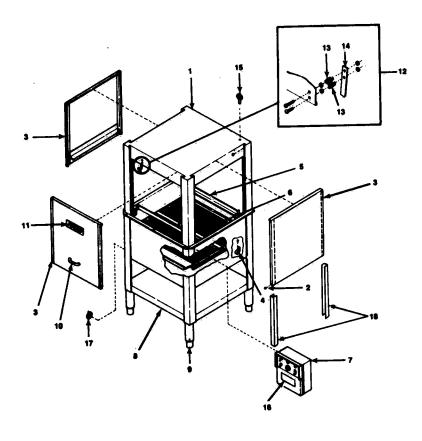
HOOD AND BASE ASSEMBLY (For Freestanding Model).
